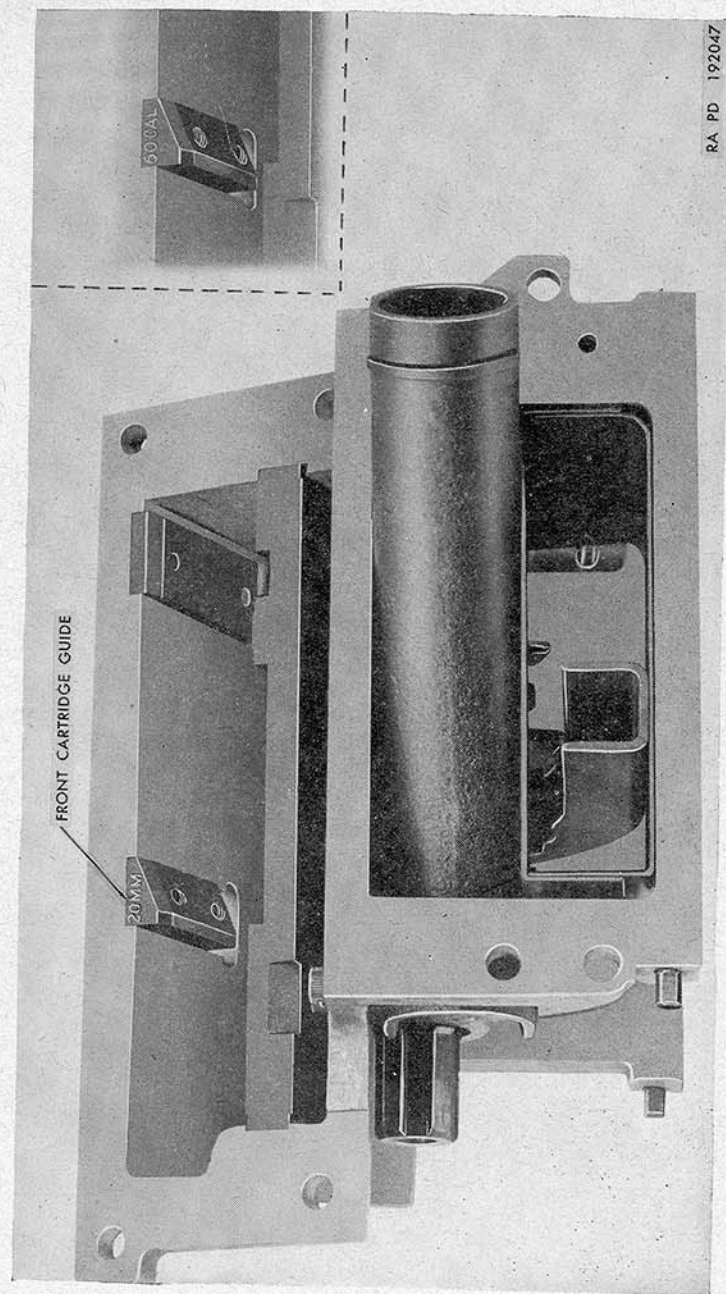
Comparison of feeder assemblies of 20-mm and cal. .60 gun—left-hand feeder shown.
